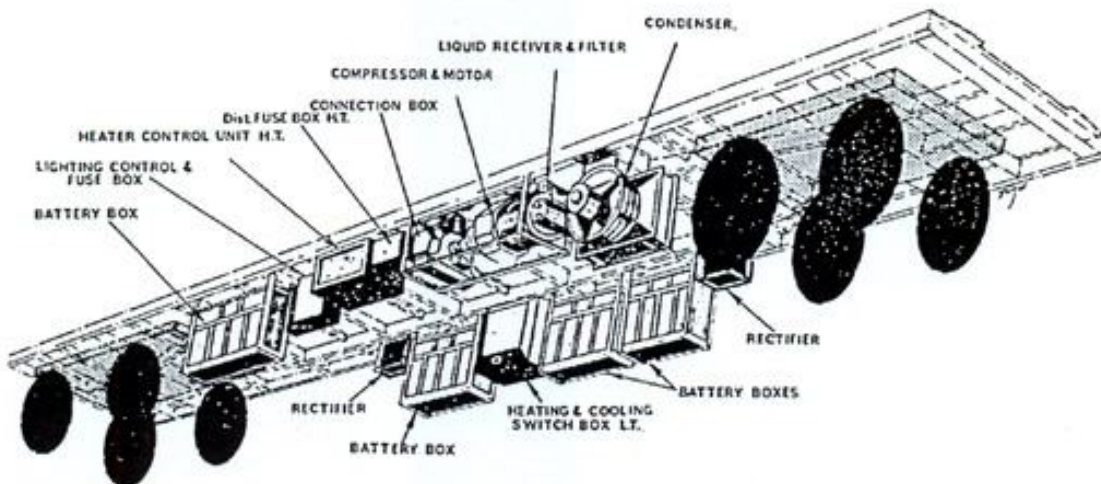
Underfloor equipment on BR air-conditioned stock (1968). (*IHVE Journal*, Vol. 37, p. 112).
